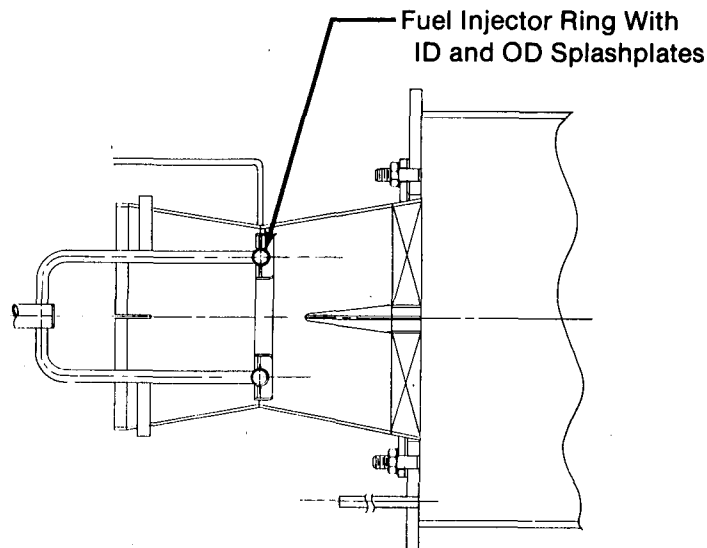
Premixing Tube Scheme 26-07A Showing Initial Design of the Spray-Ring Fuel Injector
